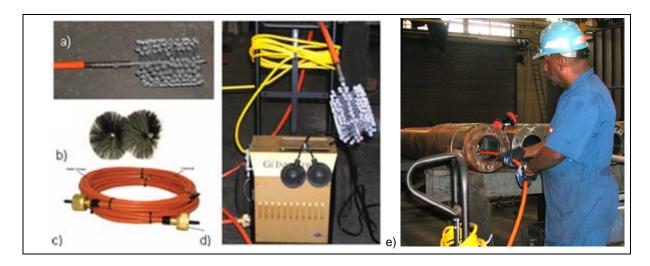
GI industries bore cleaning (a) ball brush, (b) swab brush, (c) flexible steel drive shaft, (d) foot-peddle-controlled electric drive motor, (e) in operation.
